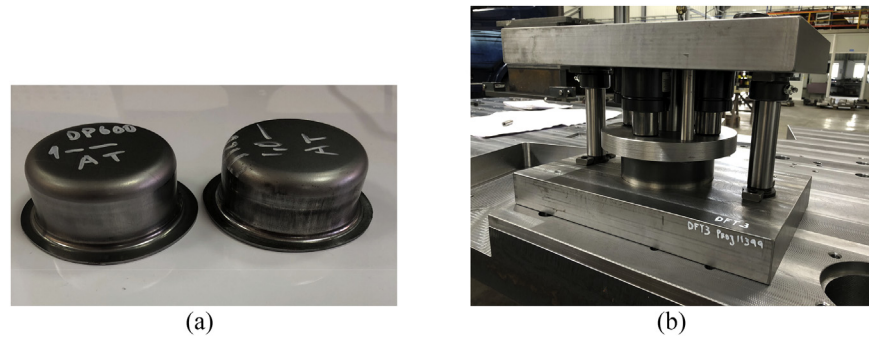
(a) Final manufactured parts; (b) Prototype validation tool.
